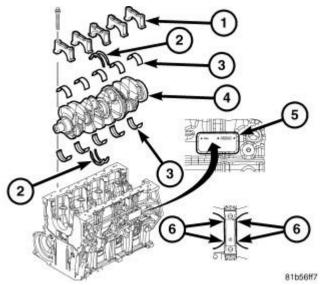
Crankshaft Bearing Size Mark Courtesy of CHRYSLER LLC
